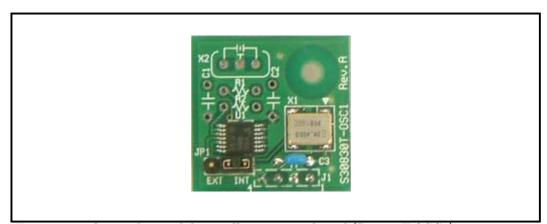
Outer shape of the oscillator circuit board (S30830T-OSC1)
